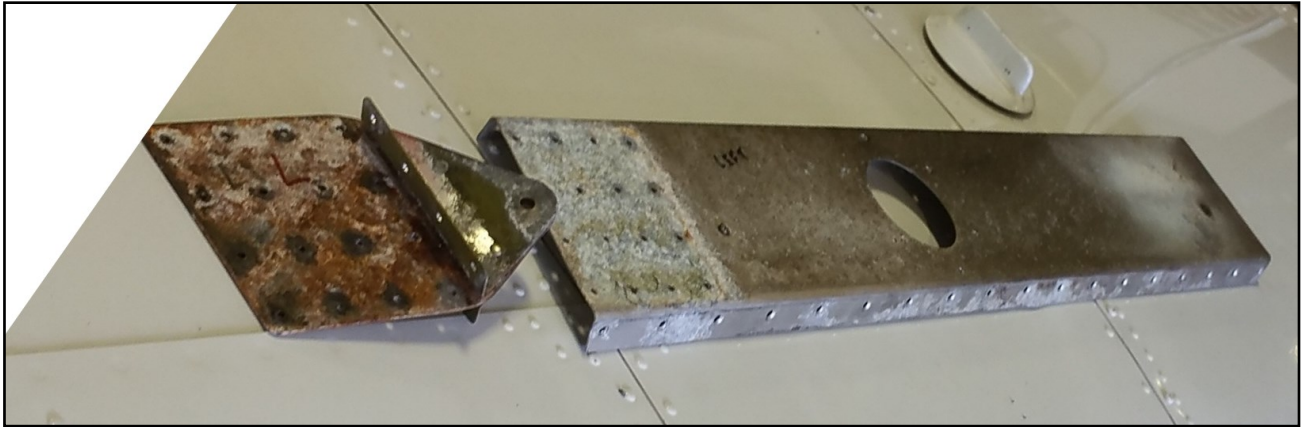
PA-28 Corroded Forward Attach Fitting and Spar Section (removed)
